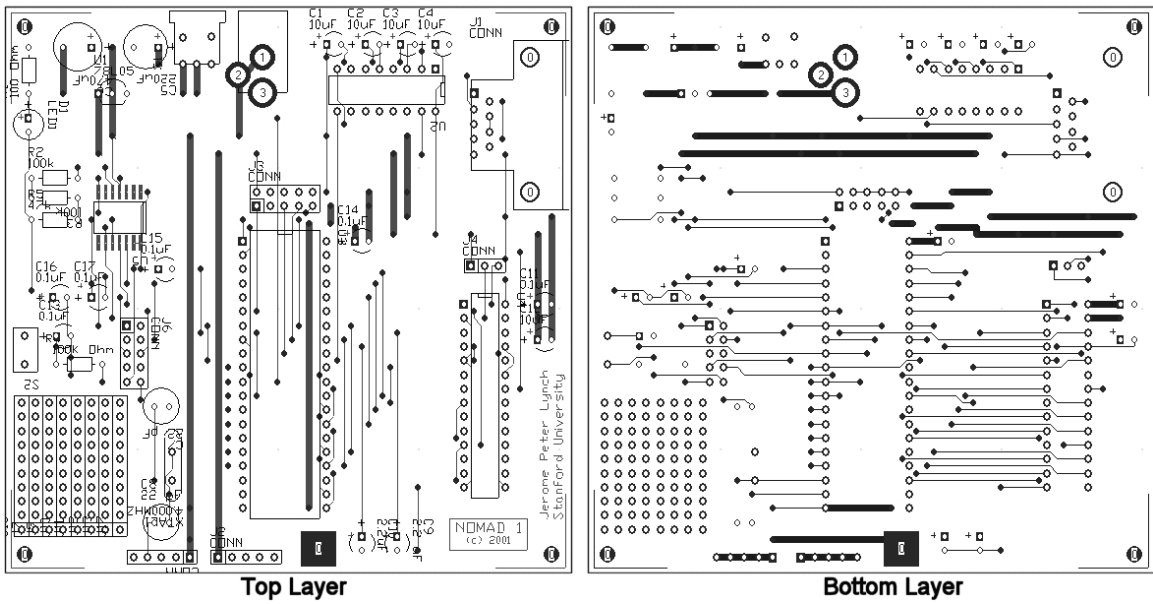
Printed circuit board overlay and copper layers (top and bottom)
